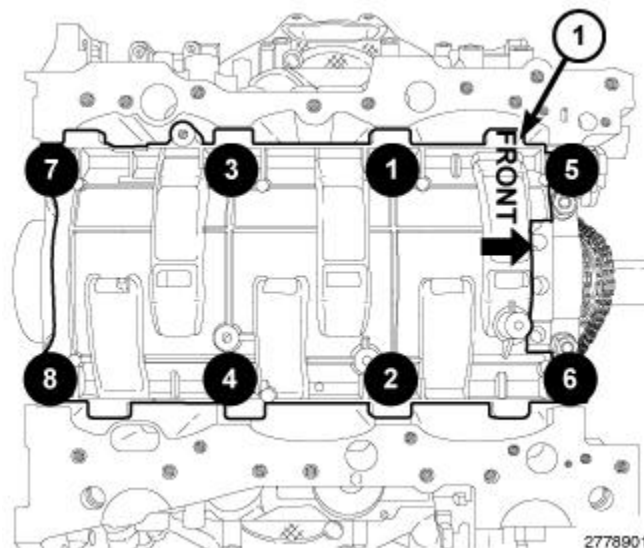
Windage Tray With Main Bearing Cap Bolts Installation Sequence
